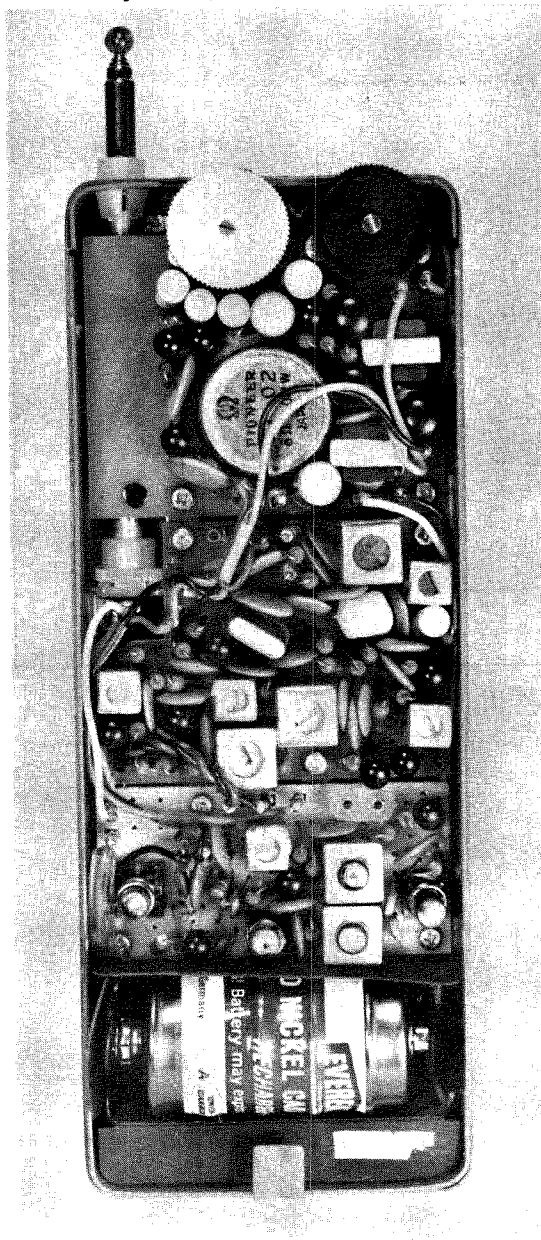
PHOTO OF OPEN UNIT SHOWS MODULAR CONSTRUCTION AND LAYOUT.
